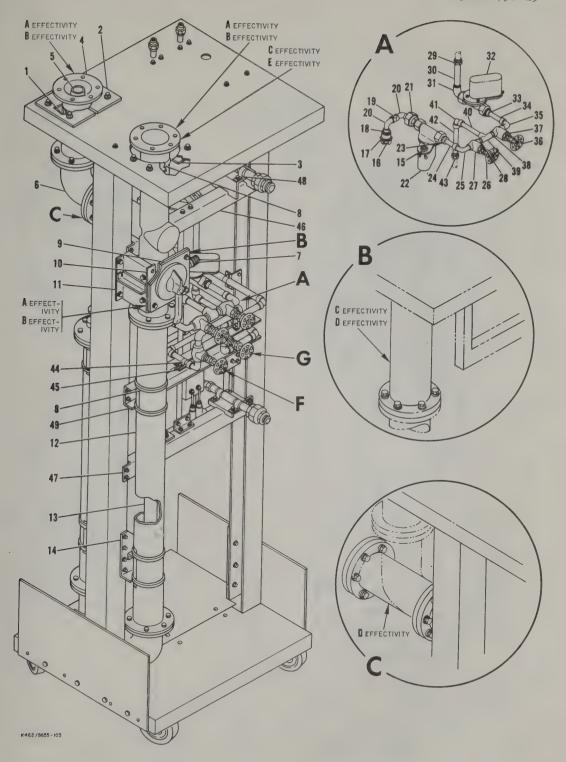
Plumbing Assembly (Sheet 1 of 3)
